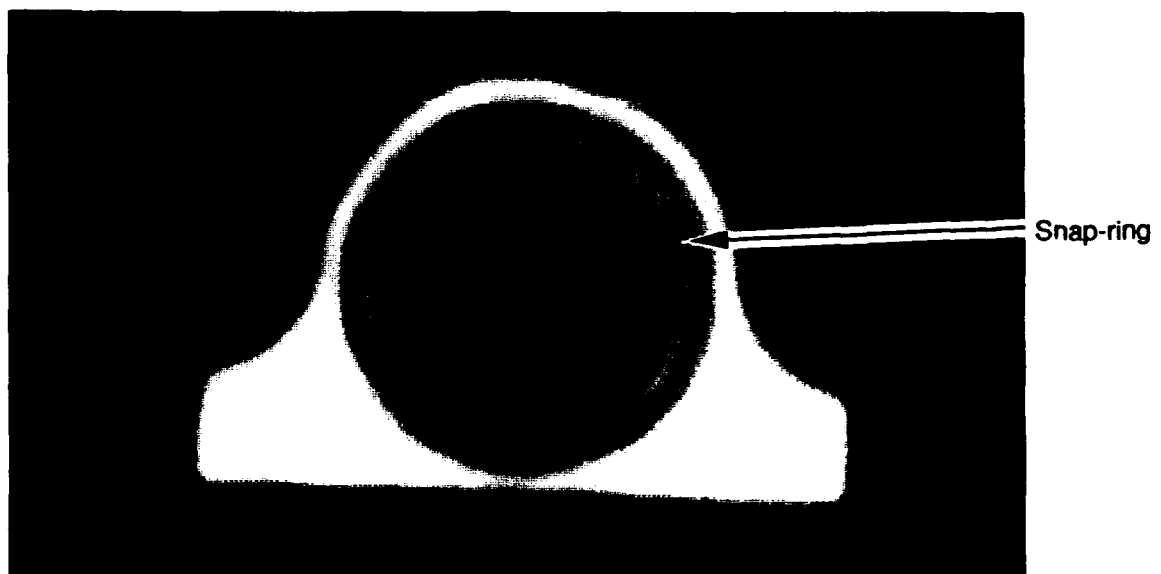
Transverse CT slice through the snap-ring of an assembled unit.
